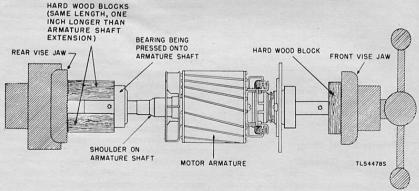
Pressing armature bearing onto its shaft by use of a vise.
